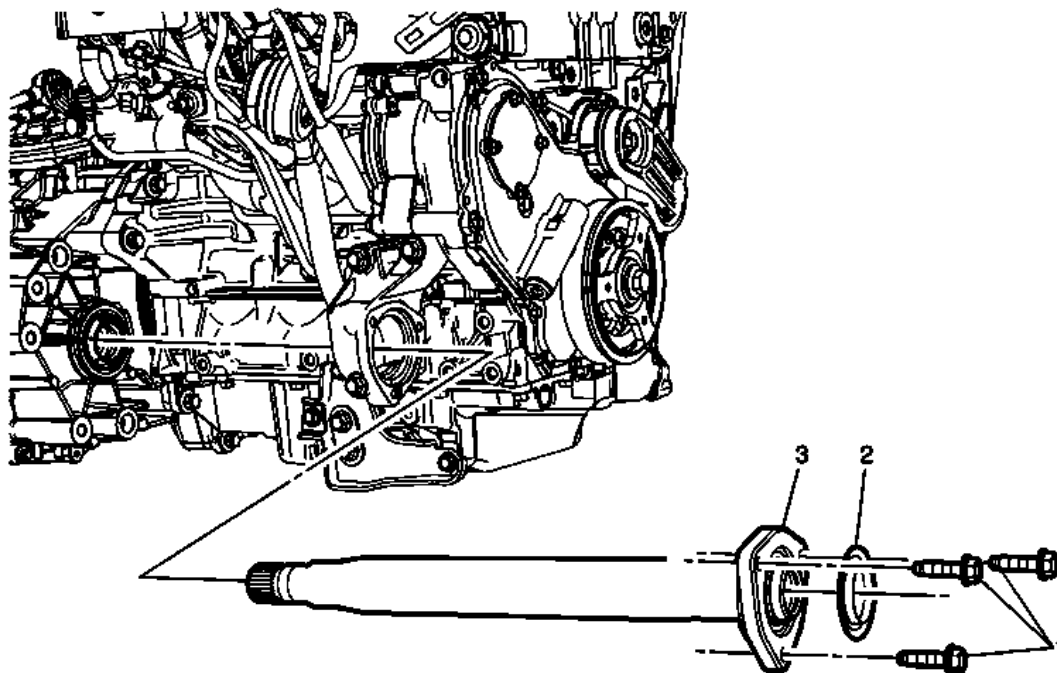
Front Wheel Drive Intermediate Shaft & Components (with MR6)
